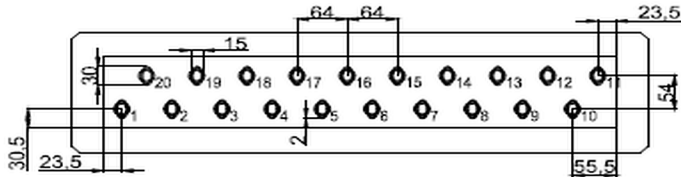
View of the sieve plate of the heat exchanger with given tube numbering
